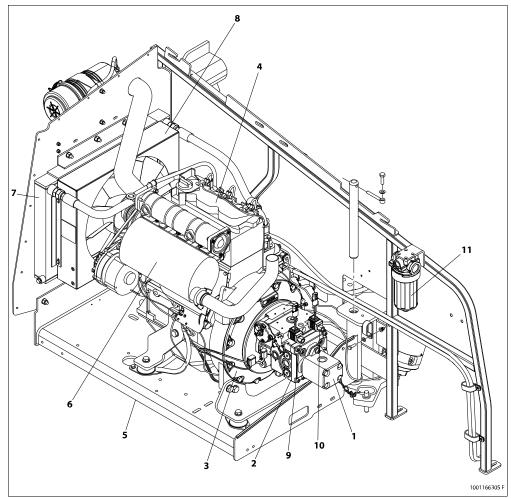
Deutz D2011L03 Engine Components - Sheet 1 of 3
